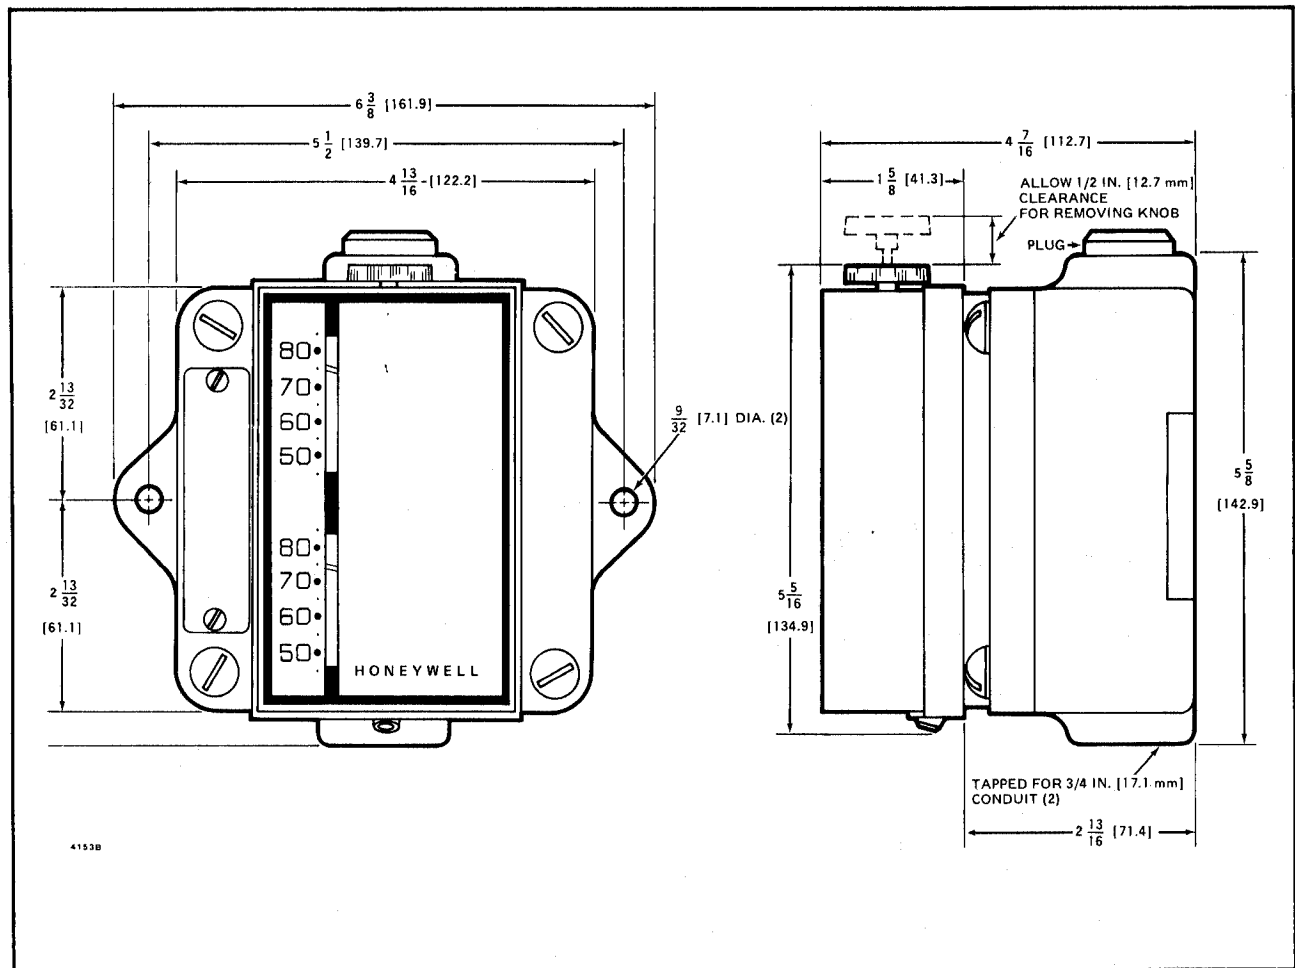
MOUNTING DIMENSIONS FOR T6051B IN INCHES [MILLIMETRES SHOWN IN BRACKETS].
